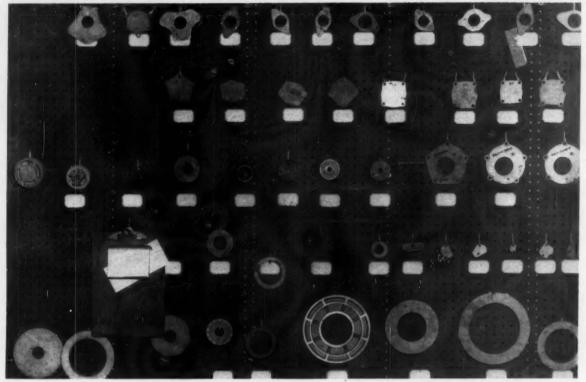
Typical castings turned out at the rate of 1,000,000 monthly. Included are oil pump cover plates, camshaft thrust washers, clutch pressure
